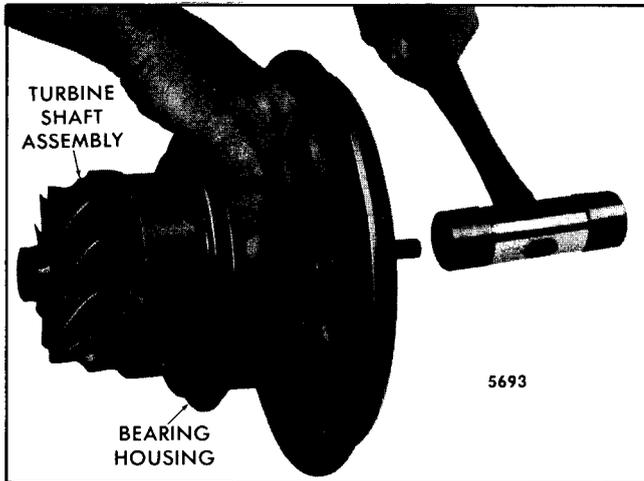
Tapping Turbine Shaft Assembly from Bearing Housing
